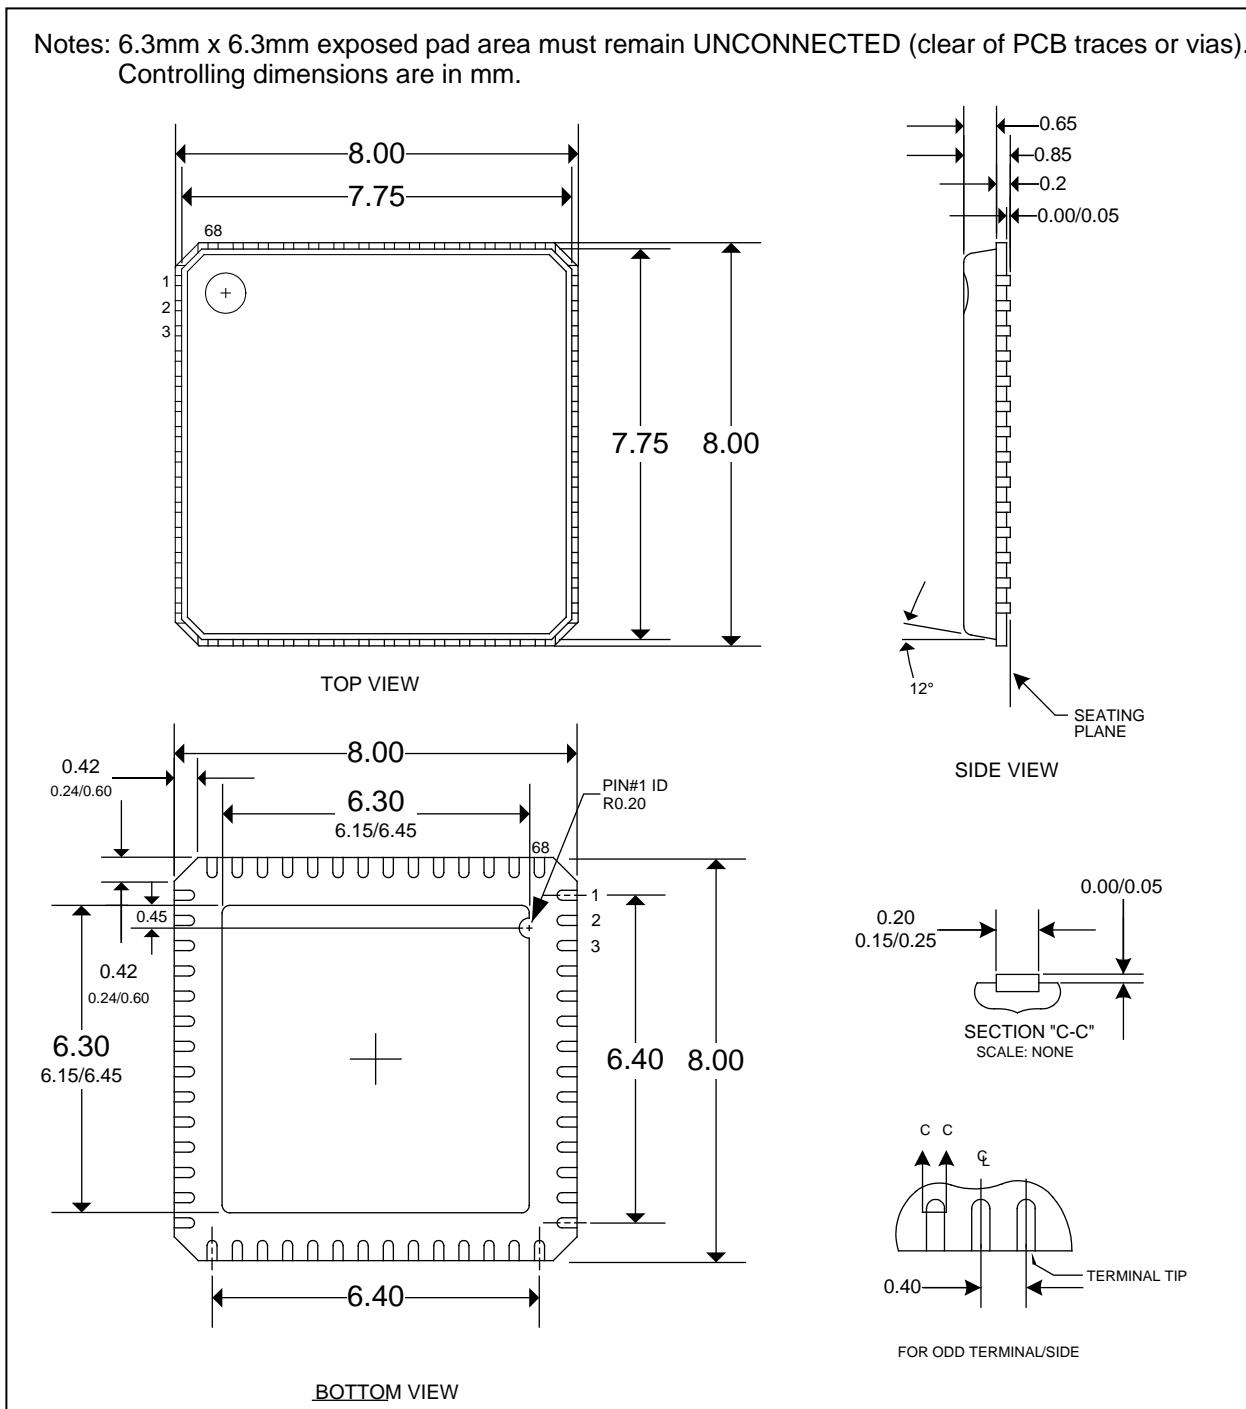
73S1210F 68 QFN Mechanical Drawing
